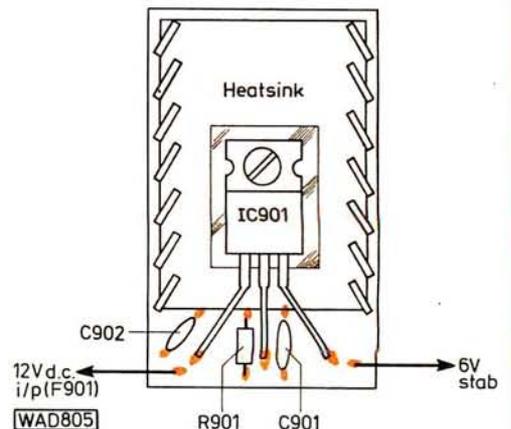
Full size copper track pattern for the 6V stabiliser board. Fig. 29 (right): Component placement. Components are soldered directly to the copper
